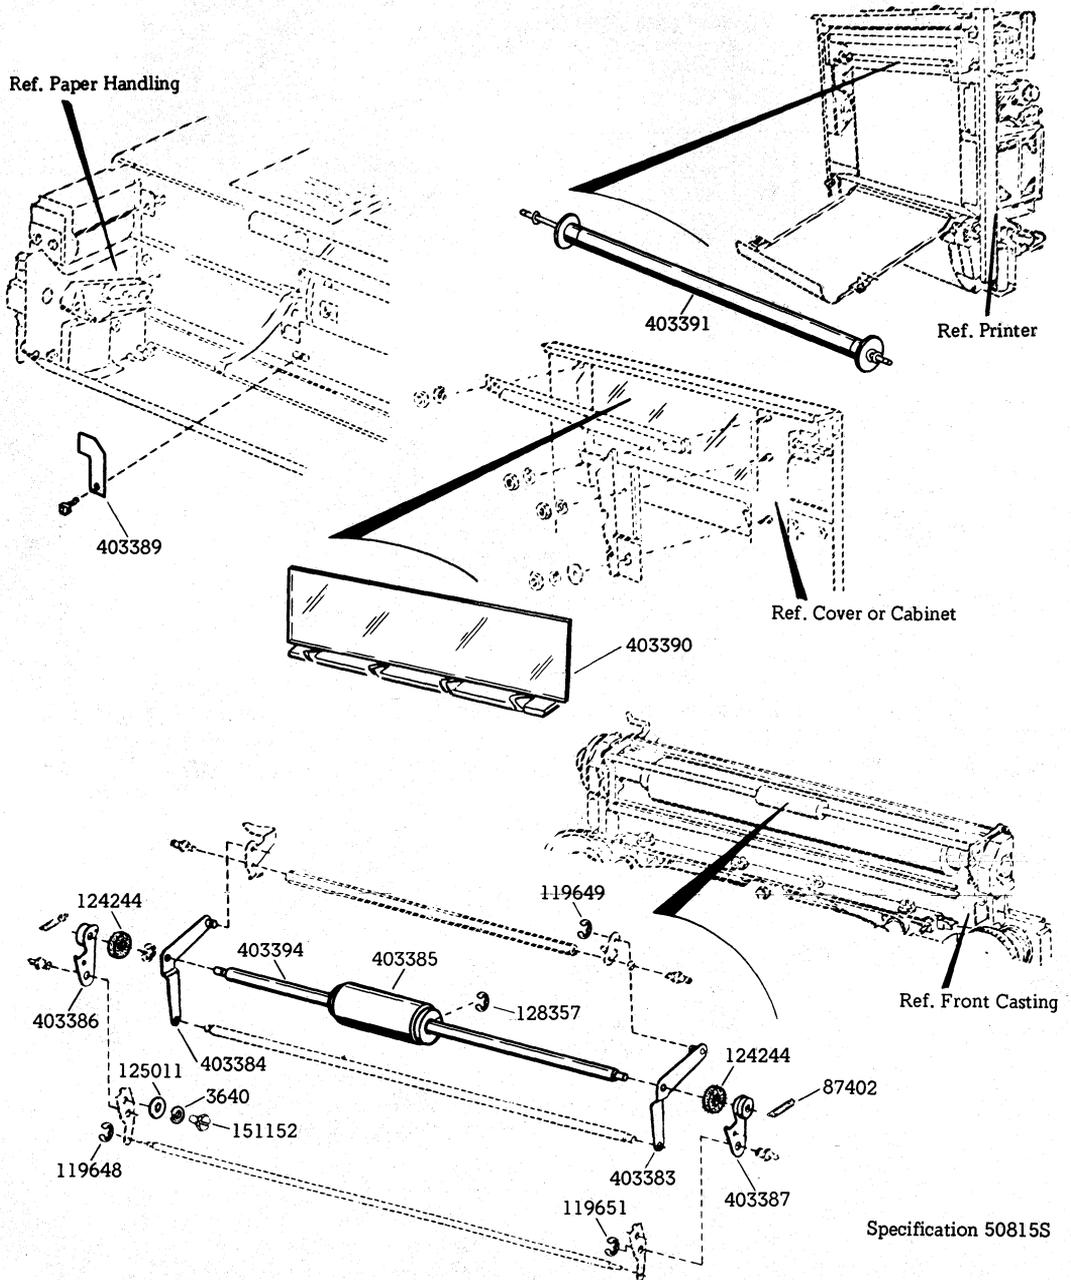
403380 Modification Kit For Multicopy Roll and Single Copy Fanfold Paper (40P101 Friction Feed Only)
